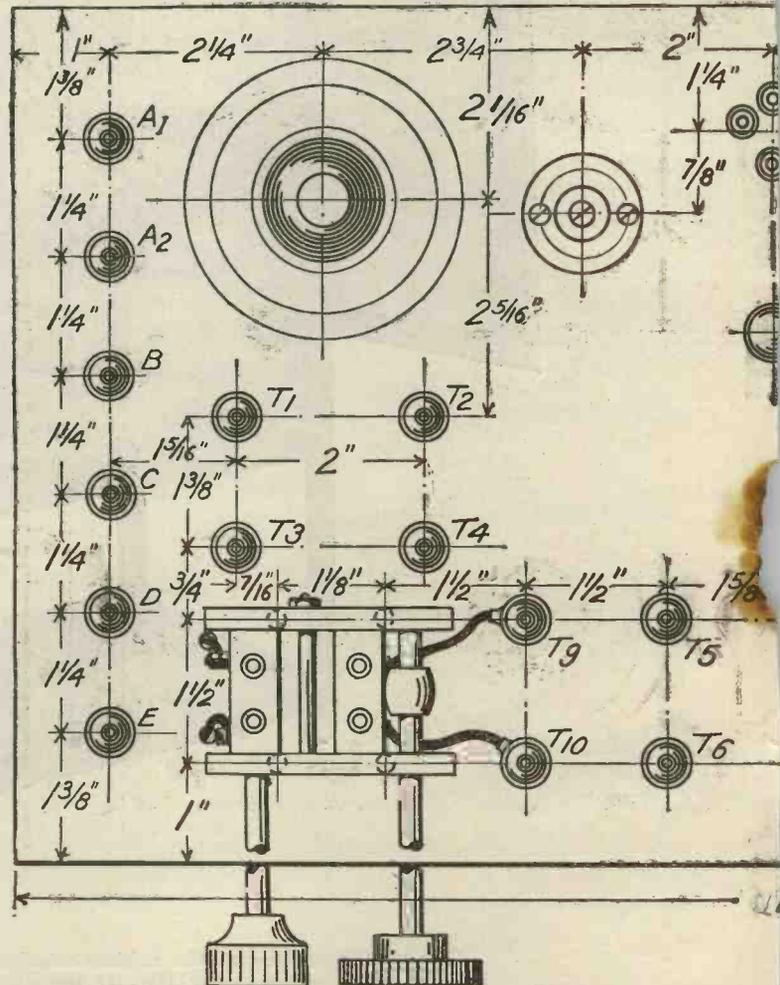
A half-size drawing, showing the layout of the parts on the panel.
